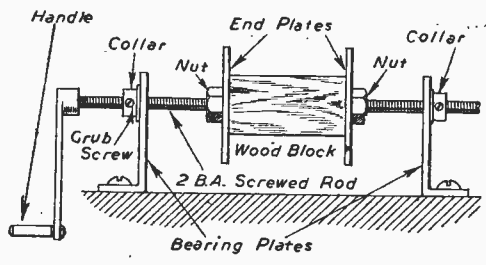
A simple form of jig of bobbin winder which may easily be made up.
